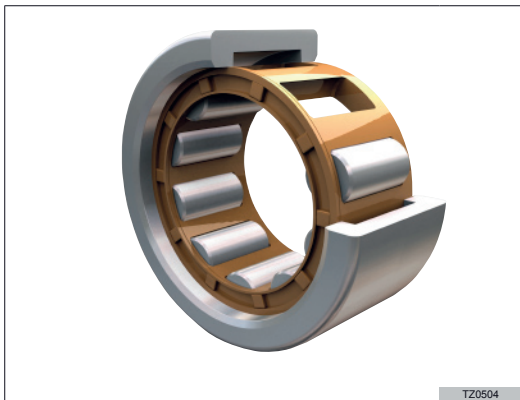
Single-row cylindrical roller bearing of RNU type, without an inner ring
